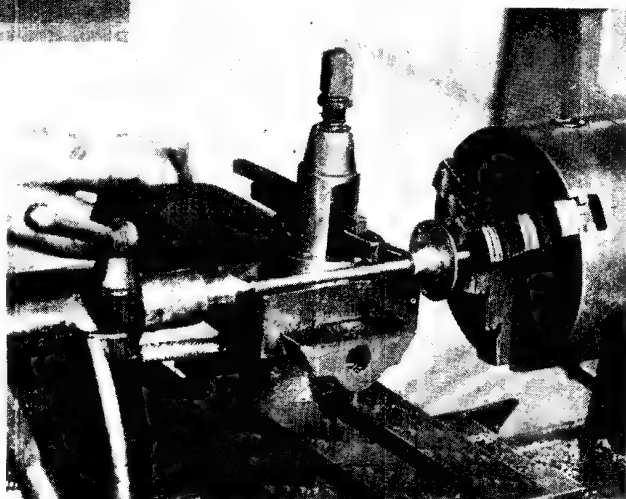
On the mandrel of the lathe is the bush being turned for the spindle of the switch. The bush has a large flange
